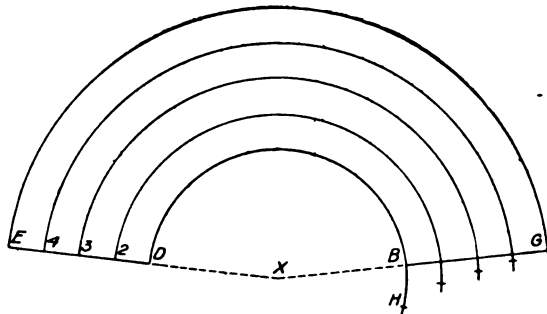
Pattern for Blank Using Radius Obtained in Fig. 85
